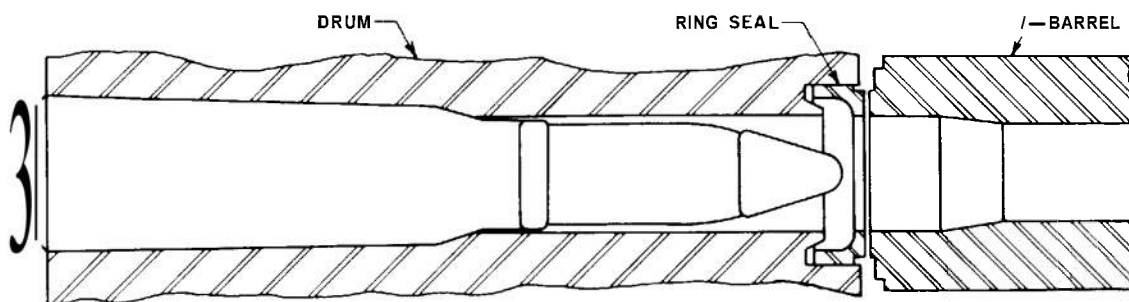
Revolver Type Tube Showing Separate Chamber With Round.
